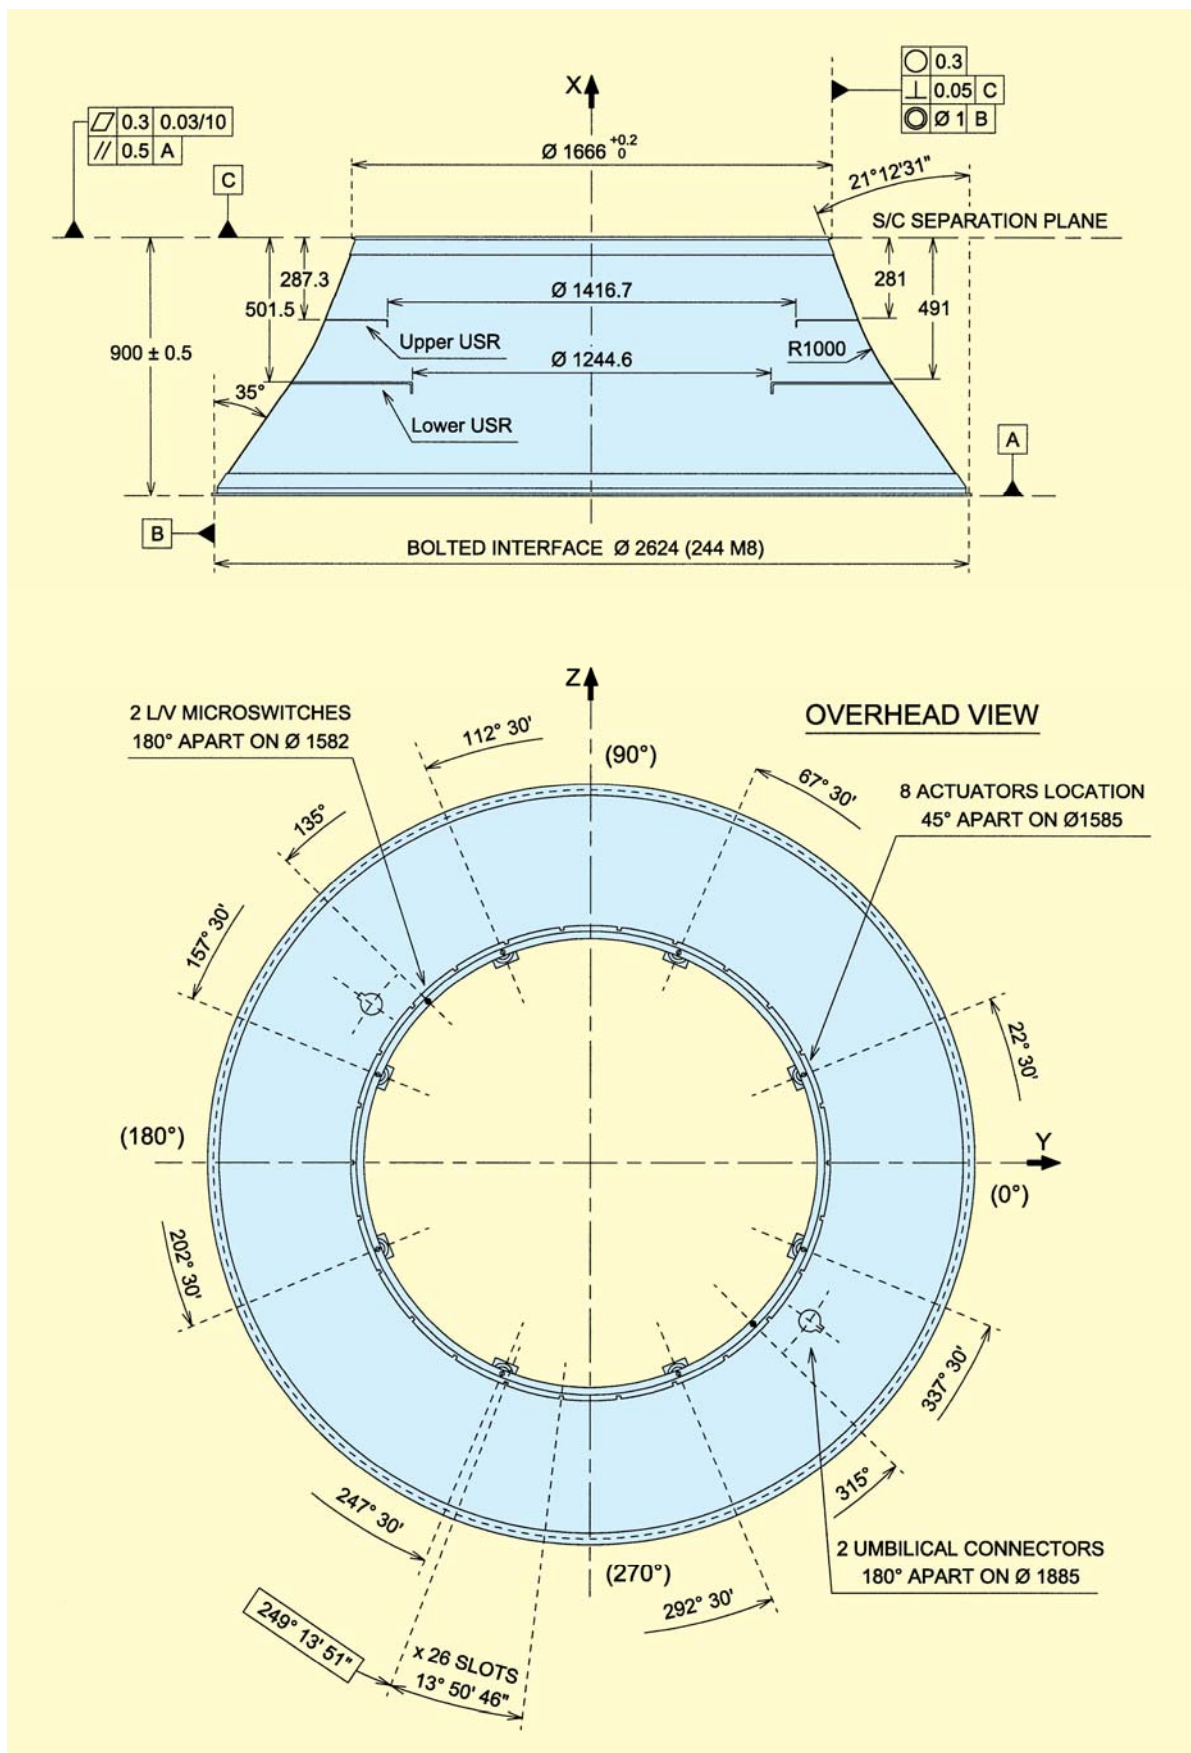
Adaptor 1666V5 – Internal springs version – General view
